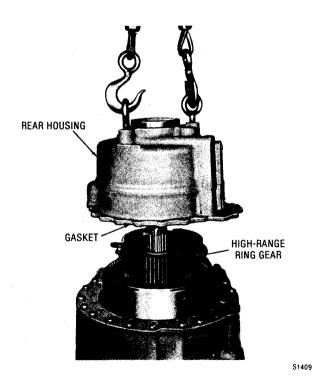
Installing transmission rear housing assembly (TRT-1)
